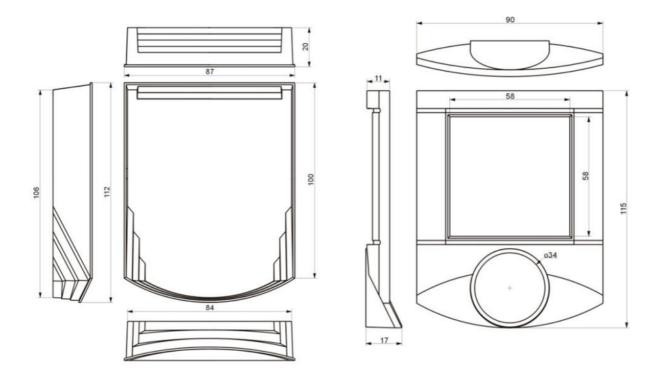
Mechanical dimensions of the RCM2-1 and R-RC-0001R modules
